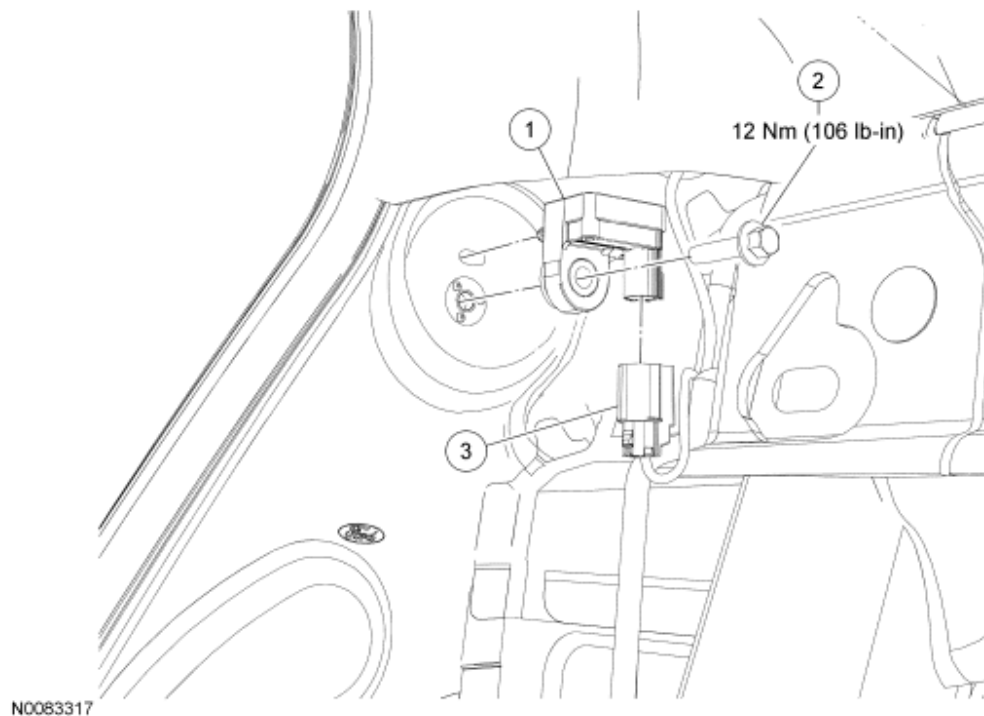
Exploded View Of Side Impact Sensor With Torque Specification - C-Pillar
